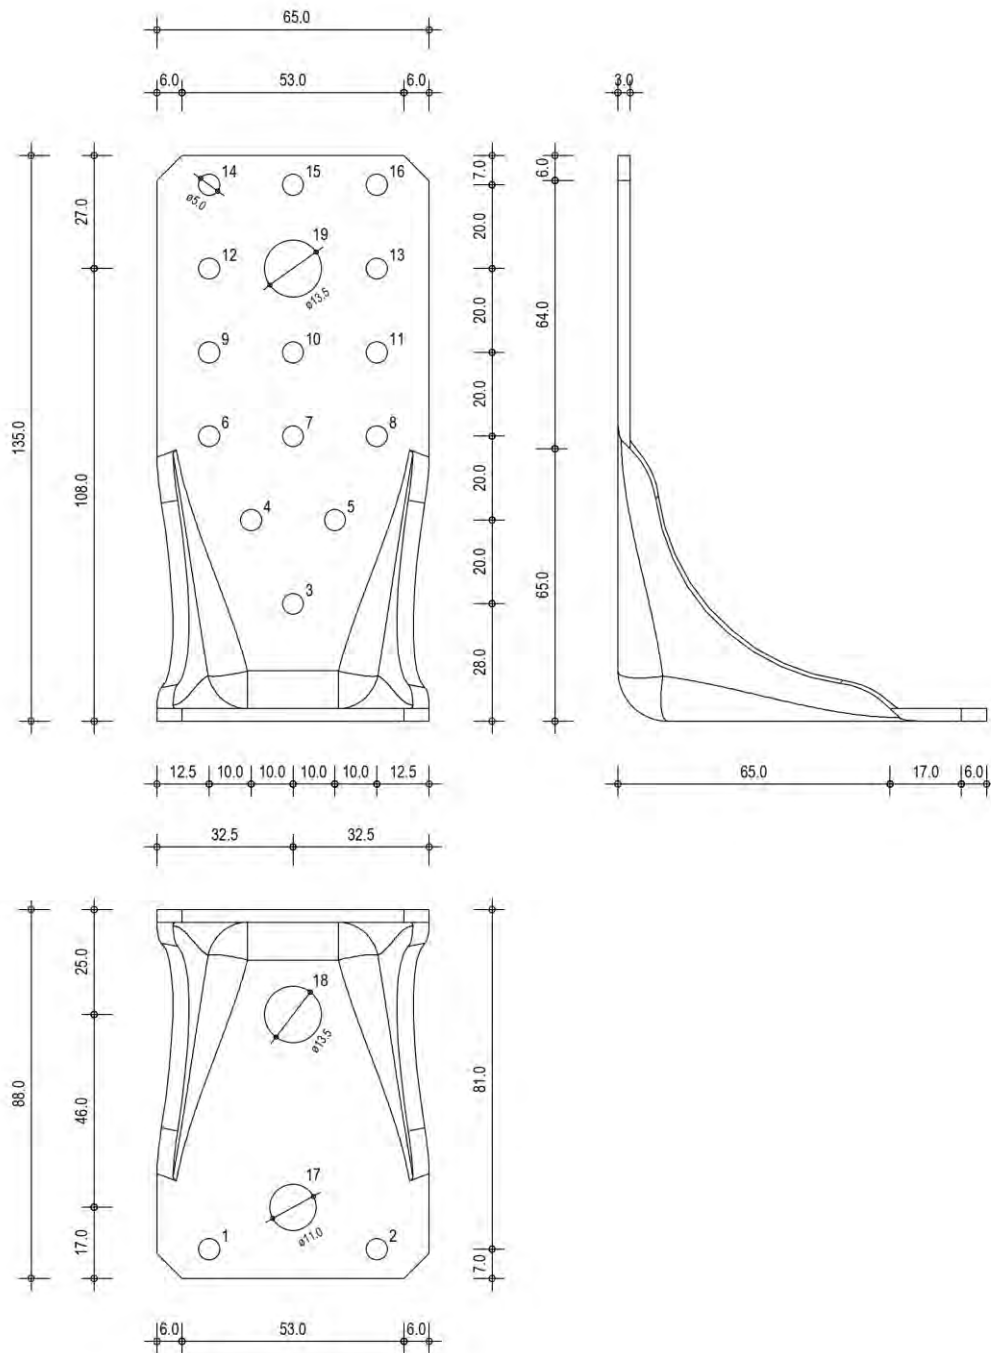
Dimensions of Angle Brackets 110285L and 112285L
